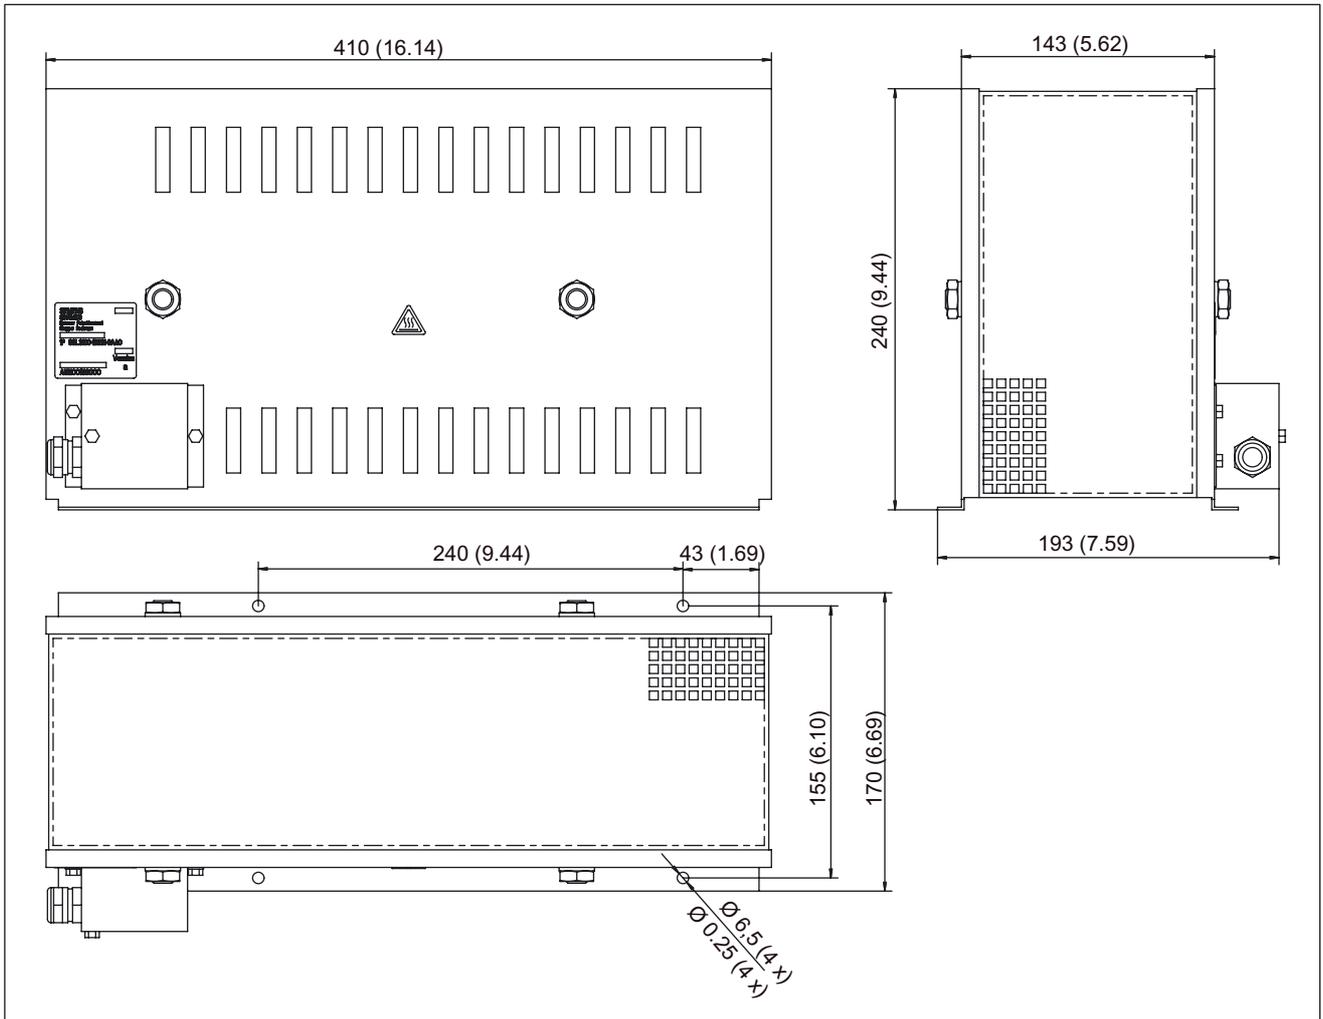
Dimension drawing of braking resistor 1.5 kW/100 kW, all dimensions in mm and (inches)
